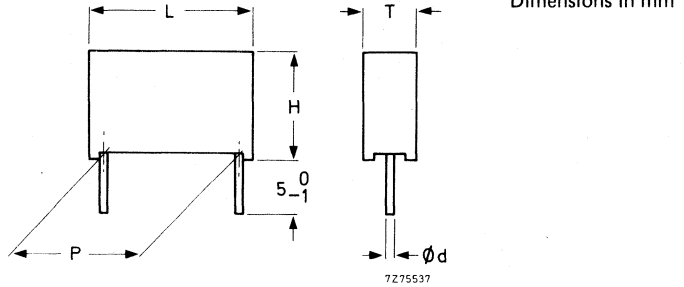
For dimensions T, L, H, P and d, see tables below.
